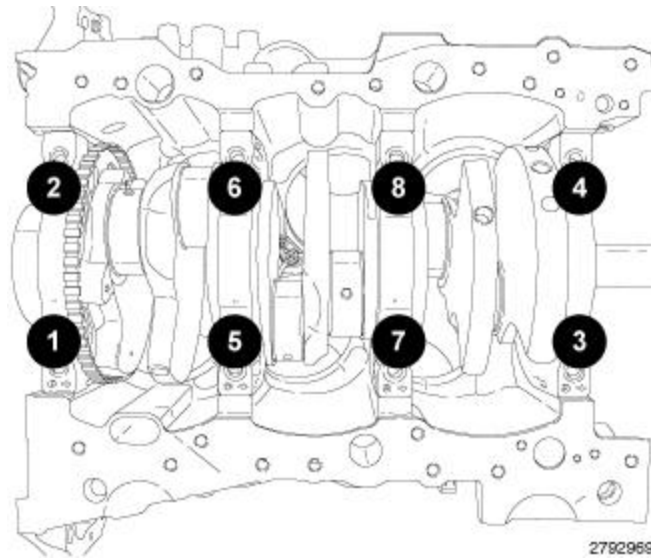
Main Bearing Cap Bolts Removal Sequence
